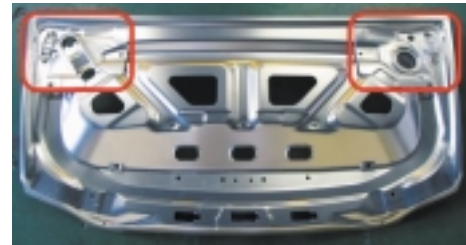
Decklid Employs Spot Friction Welding of Aluminum and Steel
